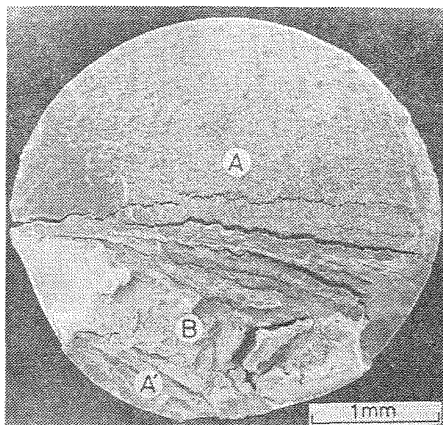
(a) Fracture surface of wire (rotating bending fatigue)
